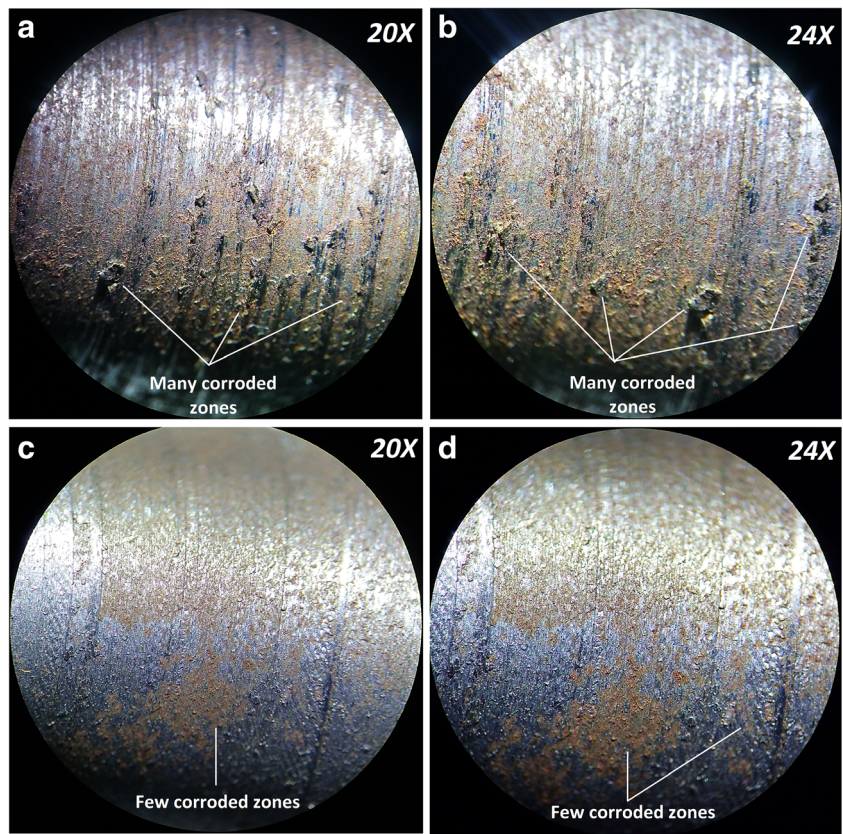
Optical microscopy images of machined AISI 1020 steel bars, after 1000 days since cutting test with: a, b uncoated HSS tool and c, d HSS tool coated $[HfN/VN]_{80}$ multilayers
